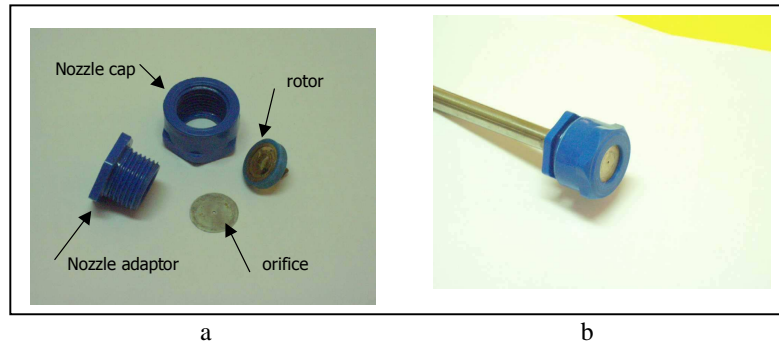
The prototype of LV nozzle : a - showing the disassembled parts; b - assembled and installed on the spray wand of the farmers’ knapsack sprayer.
